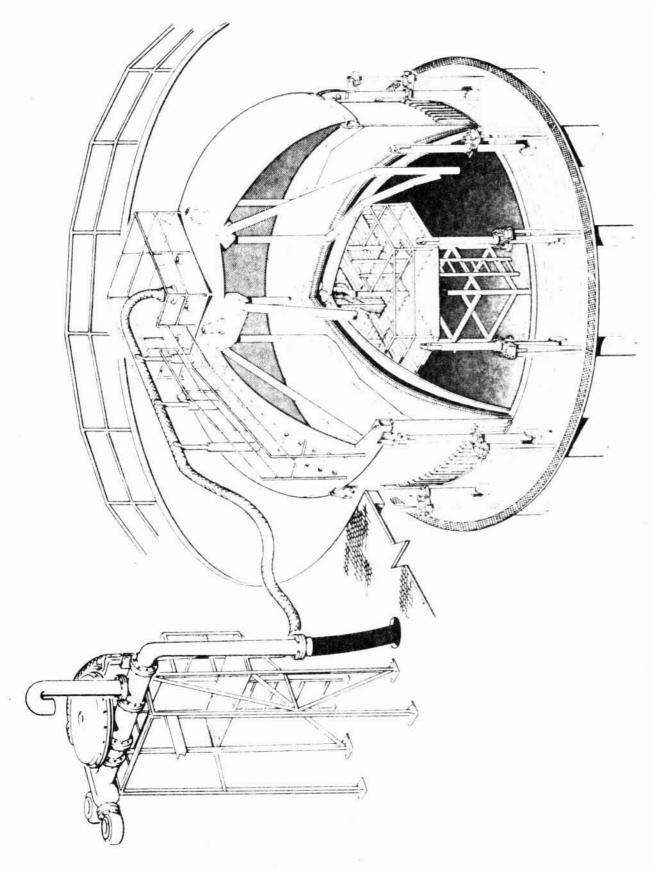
LOX Tank in Hydrostatic Holding Fixture (T-72060024)
